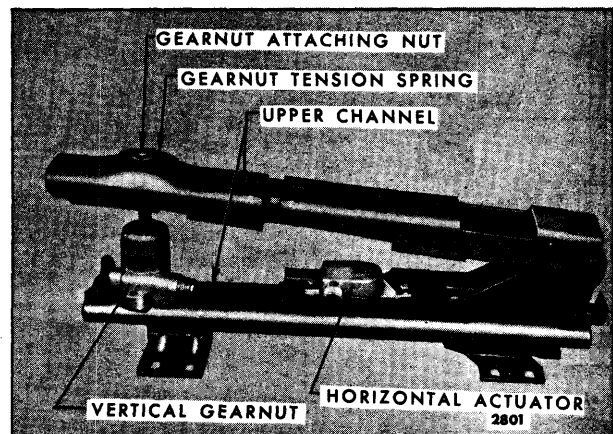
Four-Way Seat Adjuster - Buick "B, C & E" Styles
